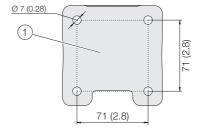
Mounting dimensions of double-compartment housing 1 Hole pattern for mounting holes
